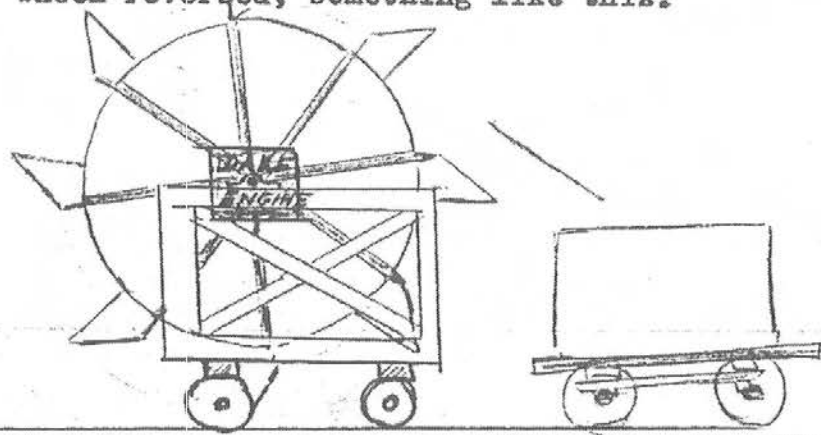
Conceptual sketch of mechanical mucking machine. (F. Burbidge)
